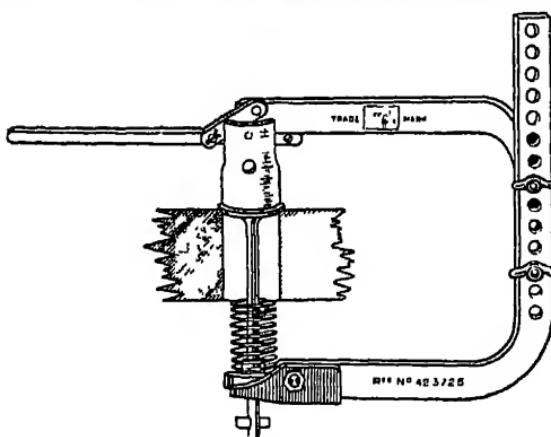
"INSTANTO" VALVE SPRING COMPRESSOR
